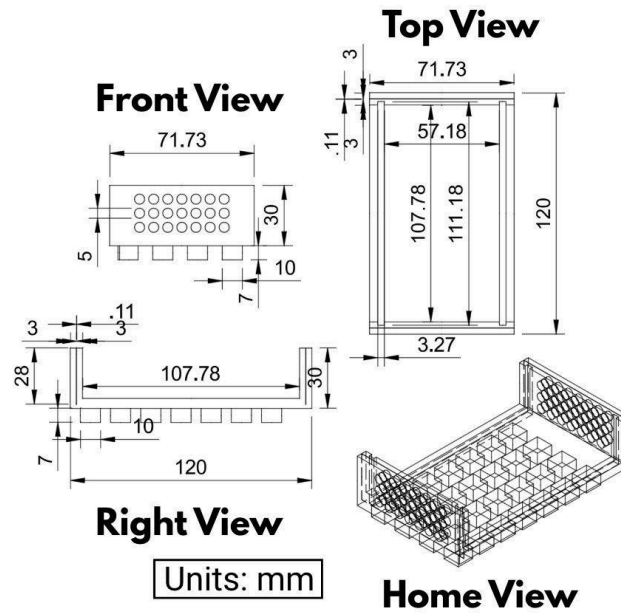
Cartridge assembly engineering drawing with front, top, right, and isometric views (units: mm).
